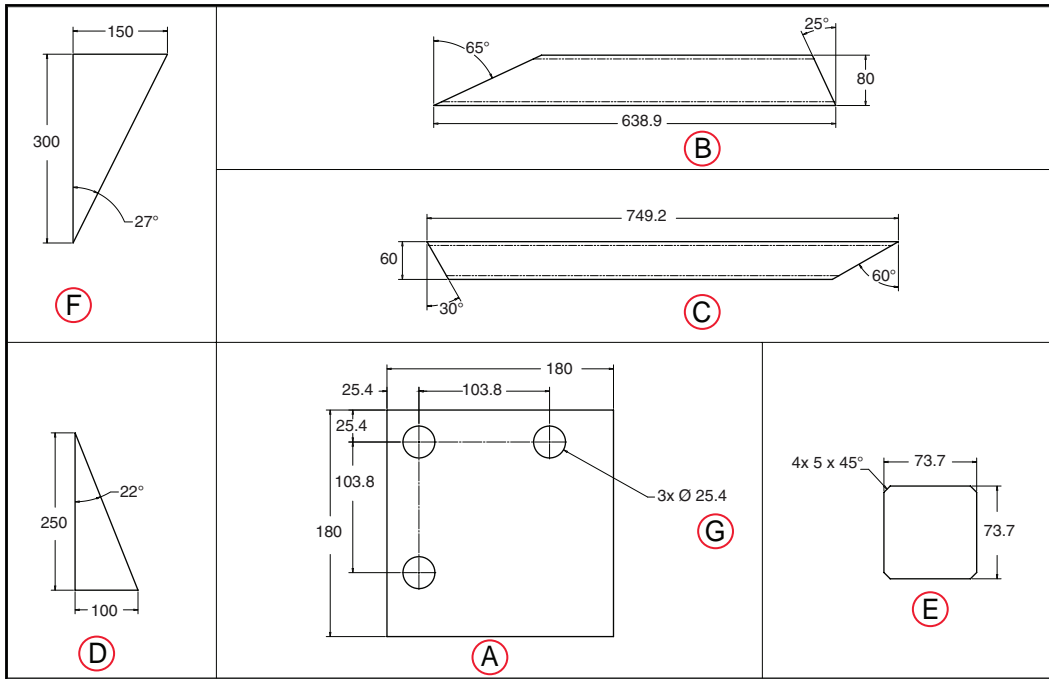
Mounting Frame, Details Items 4-5, 7-10
